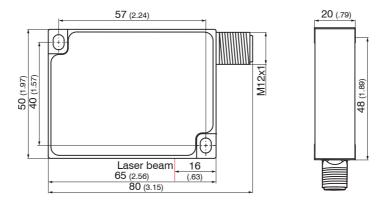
Dimensions ILD1402-xSC, dimensions in mm (inches), not to scale
